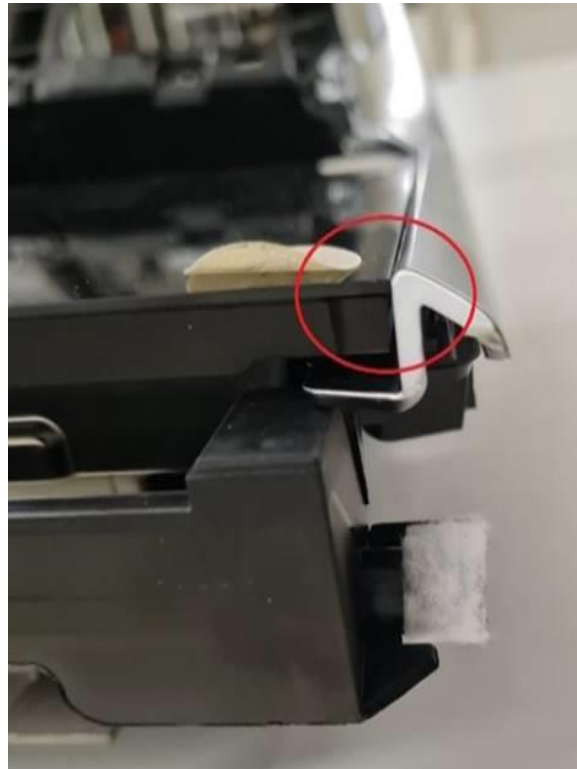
Hard contact between lower MMI display and center console insert/trim.
